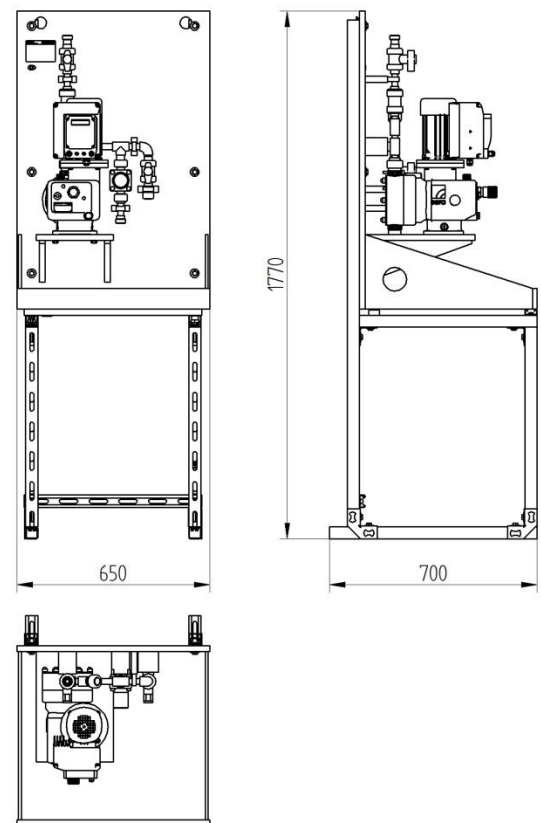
Dimensions of the CVD1s (floor mounting, steel stand)
